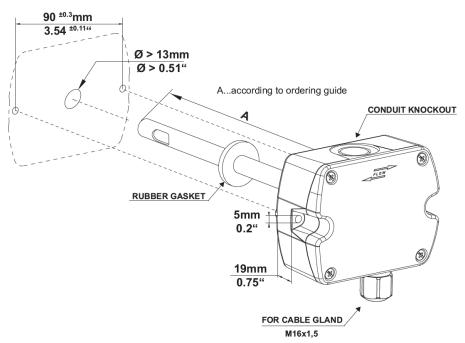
Direct mounting on duct (probe length A = 200 mm)
